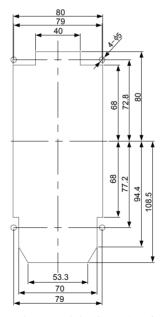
Sheet metal slot dimensions (unit: mm)
